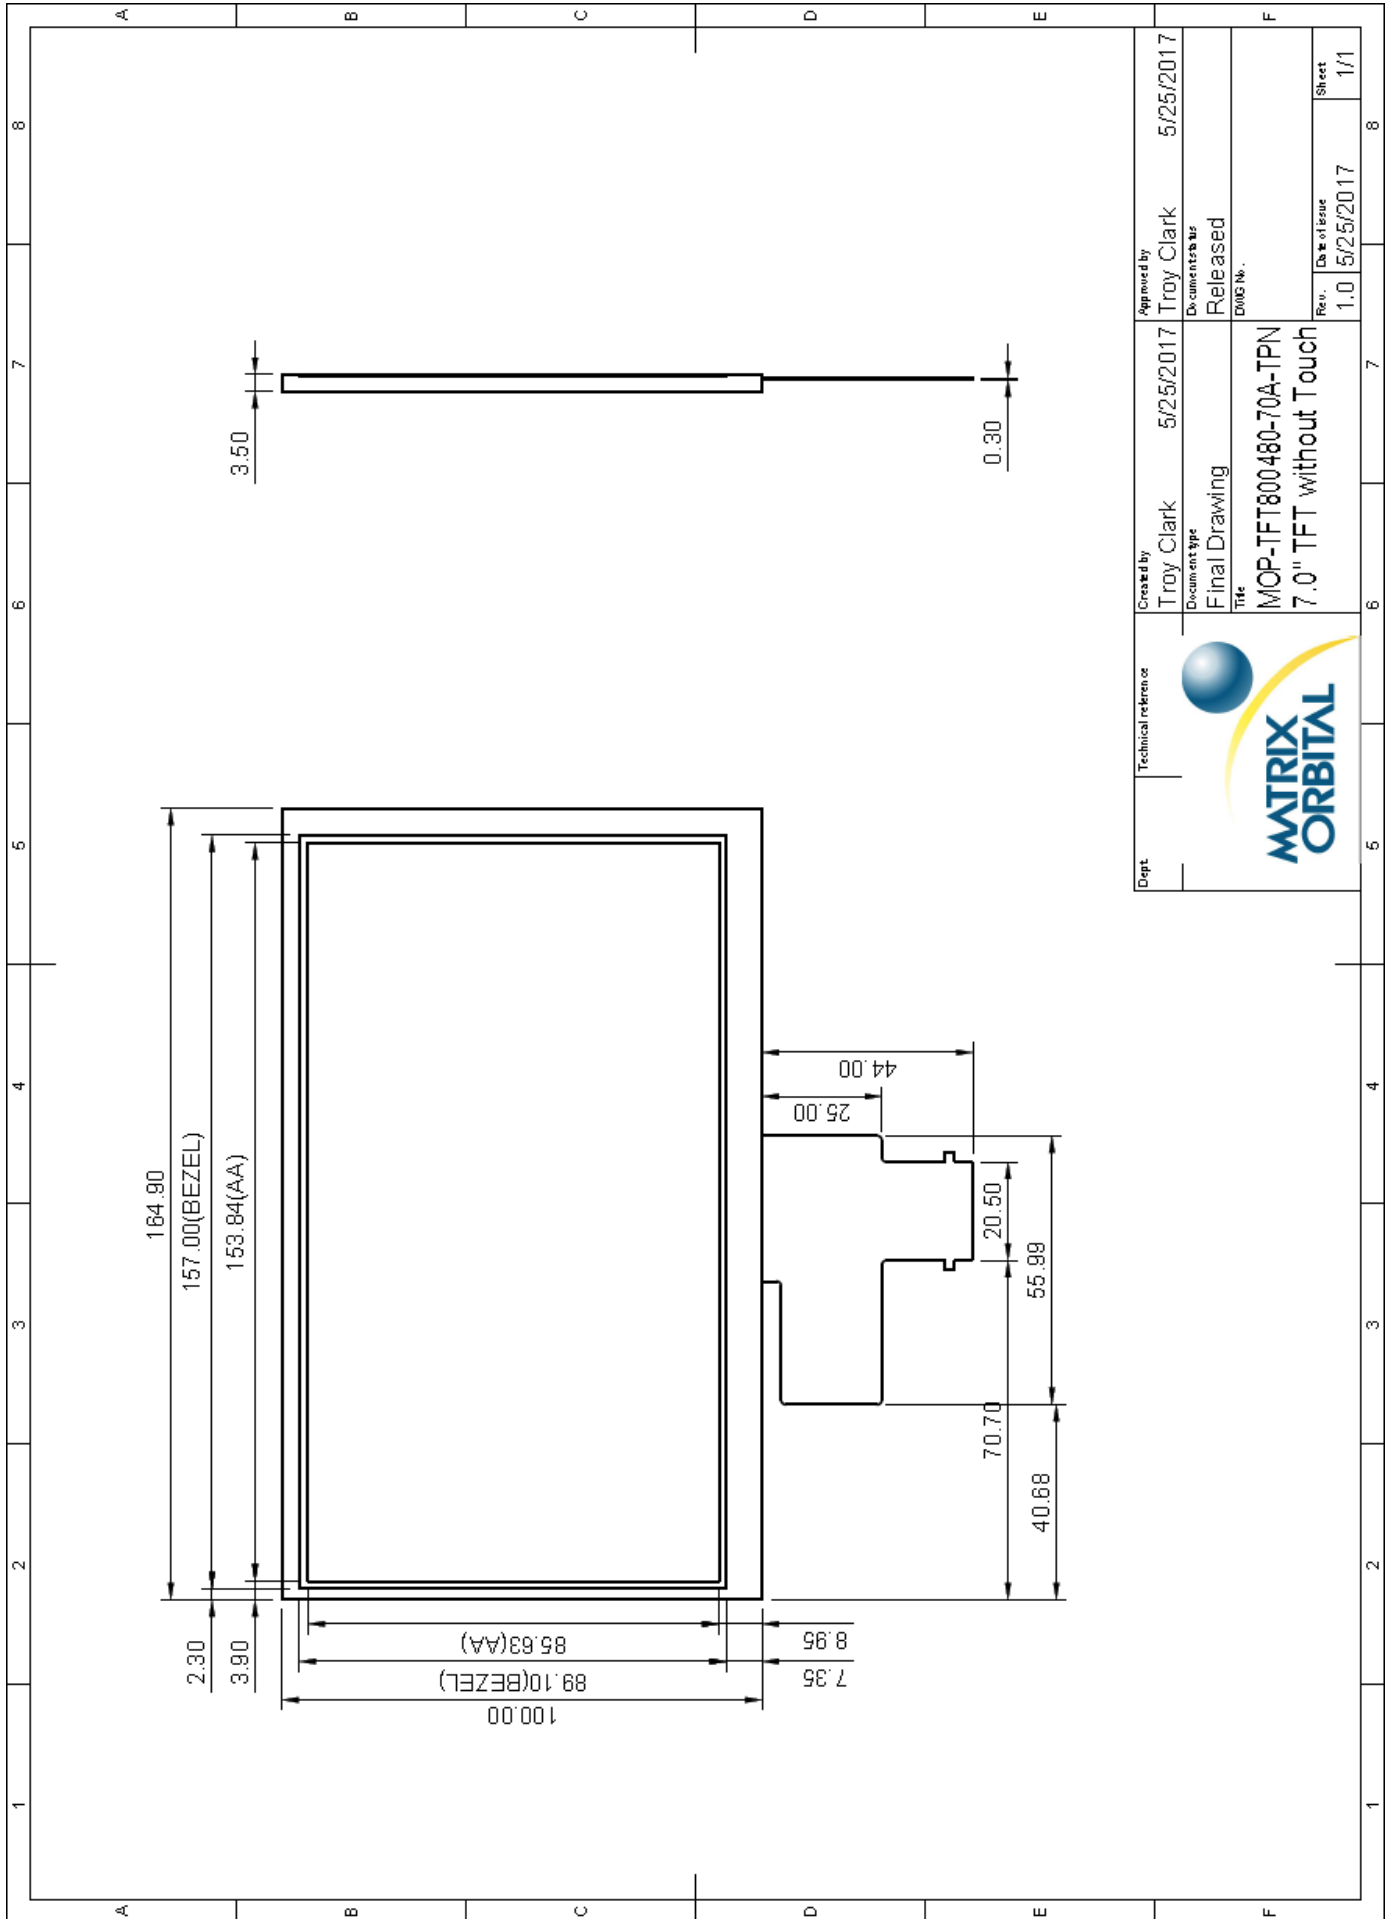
MOP-TFT800480-70A-BLM-TPN Drawing
